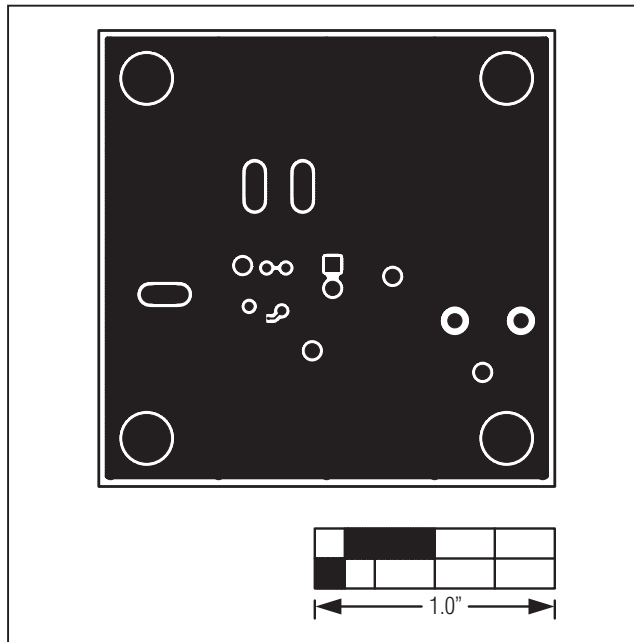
MAX97200A EV Kit PCB Layout—Layer 2
